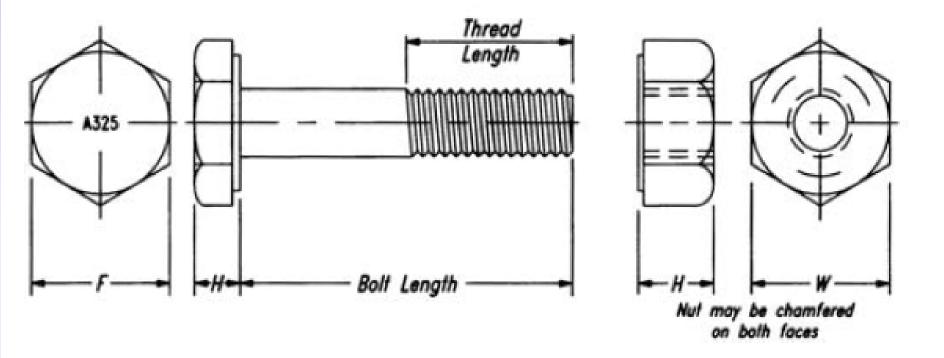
Heavy-hex structural bolt and heavy-hex nut.
